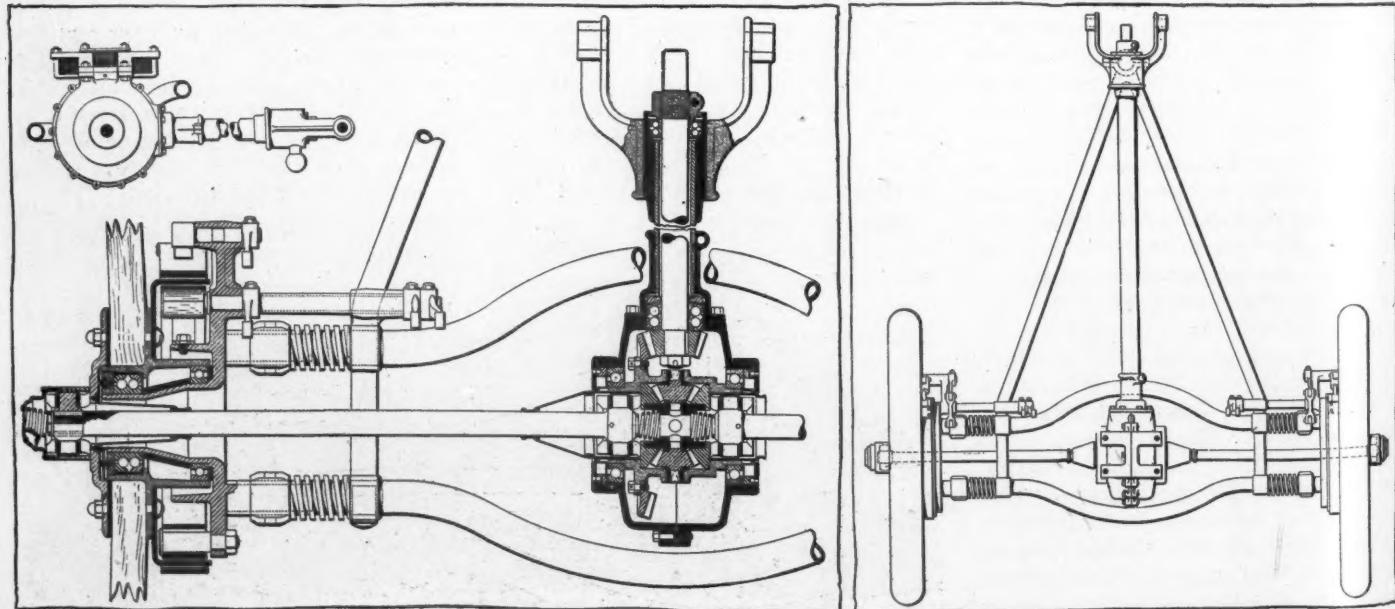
SECTIONAL VIEWS SHOWING UNIVERSAL JOINTS
